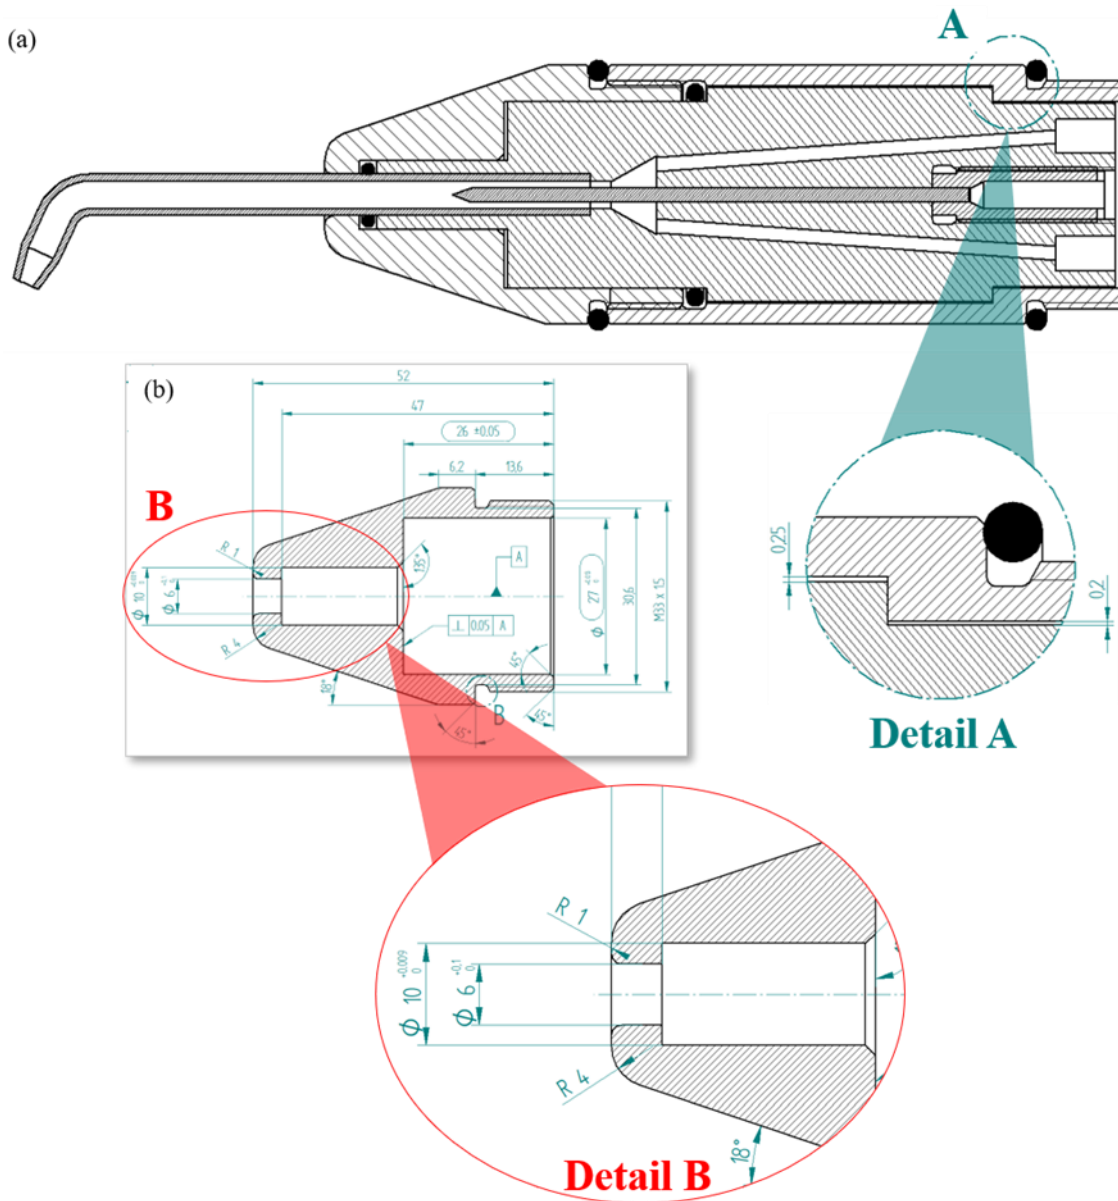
(a) Section view of the handpiece and the (b) cover.
